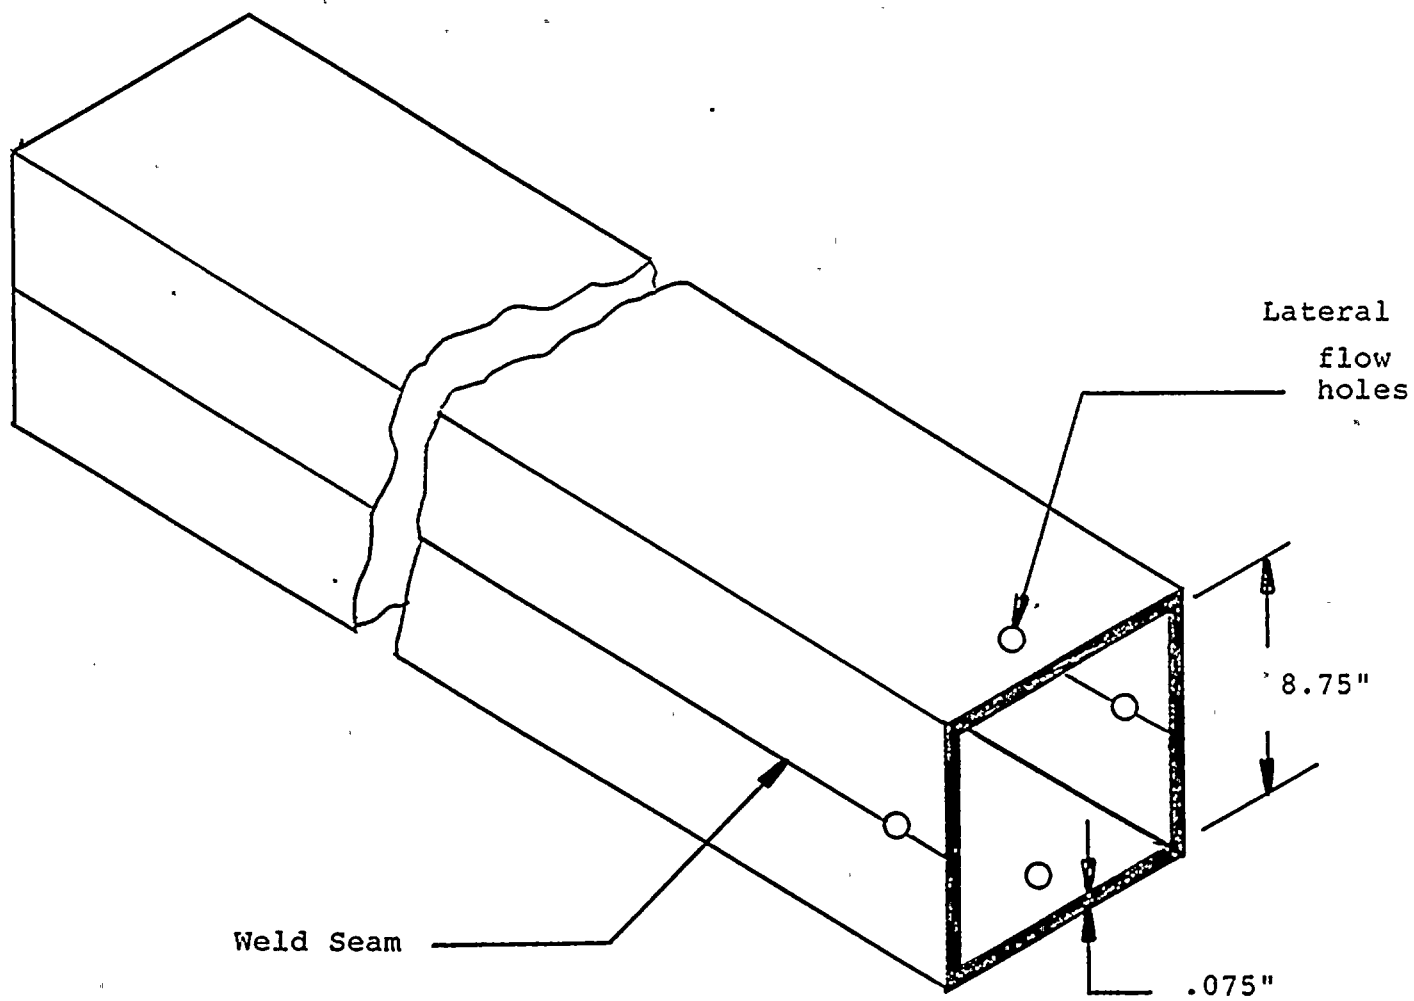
SEAM WELDING PRECISION FORMED CHANNELS
